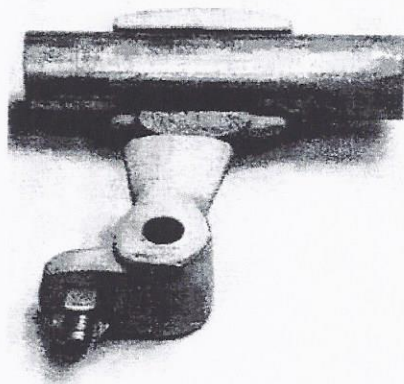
Fracture of sleeve clamp in tension.
